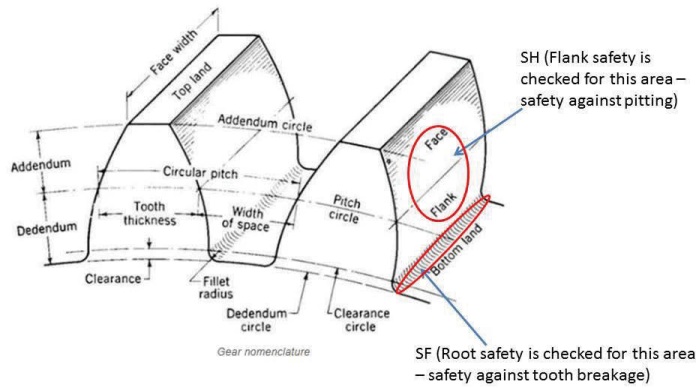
S_H over the flank and S_F over the root of the gear tooth
